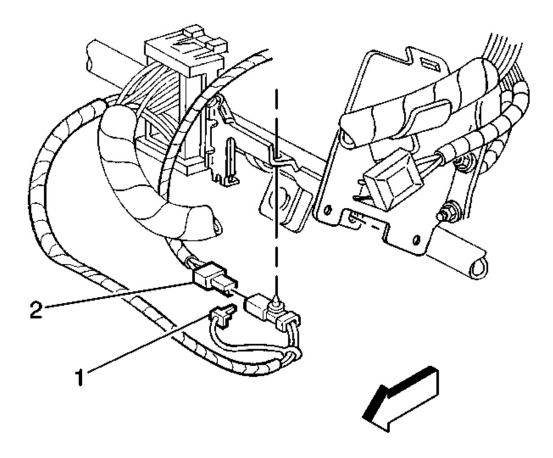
Locating Inflatable Restraint Steering Wheel Module Connector Courtesy of GENERAL MOTORS CORP.
